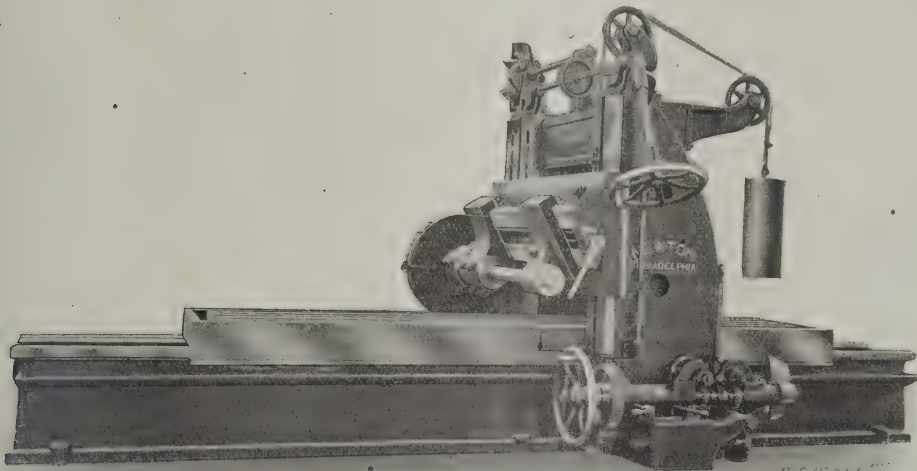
Side View of Newton Slab Miller, showing Feed Mechanism.
